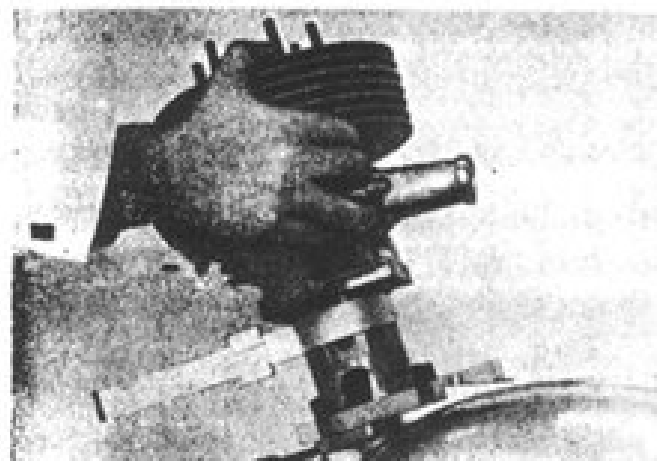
Setting the cylinder, HX-II-3 motorcycle.
